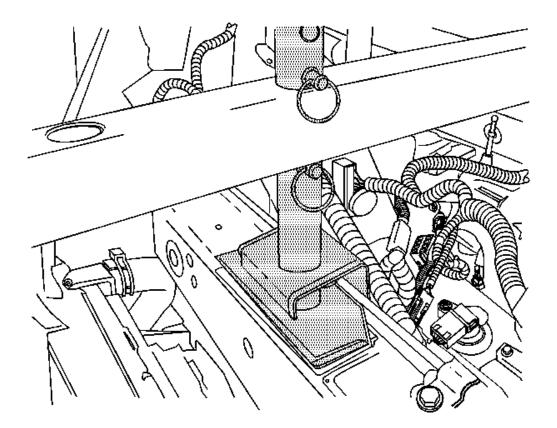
Identifying Special Tools - J 28467-4A & J 36462-1A Courtesy of GENERAL MOTORS CORP.
